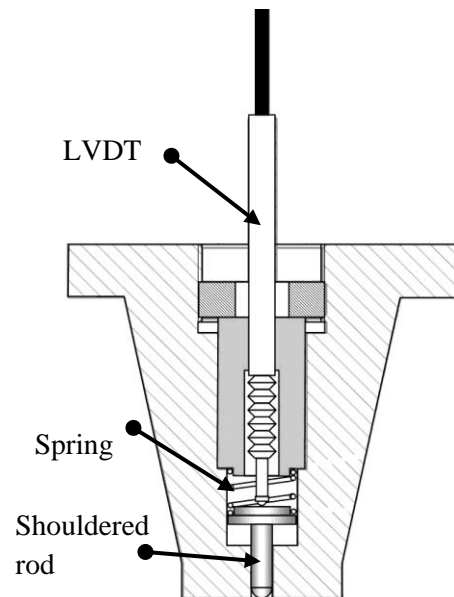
Cut view of the upper bearing device. It is clamped under the load cell of the testing machine.
